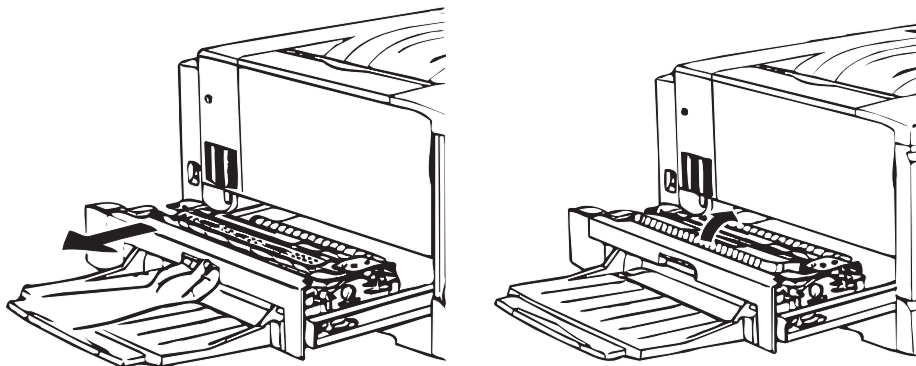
OIL ROLL ASSEMBLY Replacement 1
